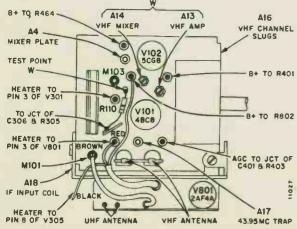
Top View of VHF Tuners 94E144-9, -22, -27, -30 and UHF Tuner 94D112-5 or 94D155-3 Showing Adjustment Locations.
